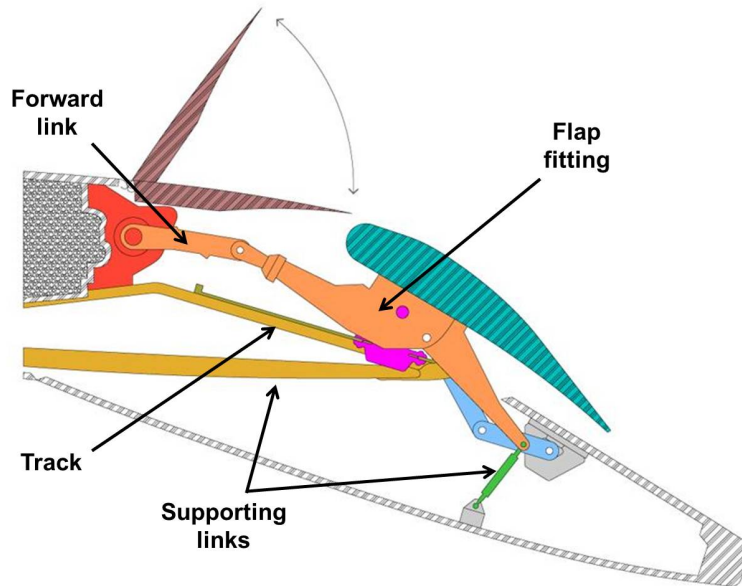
Parts composing the link-track deployment mechanism [109]
